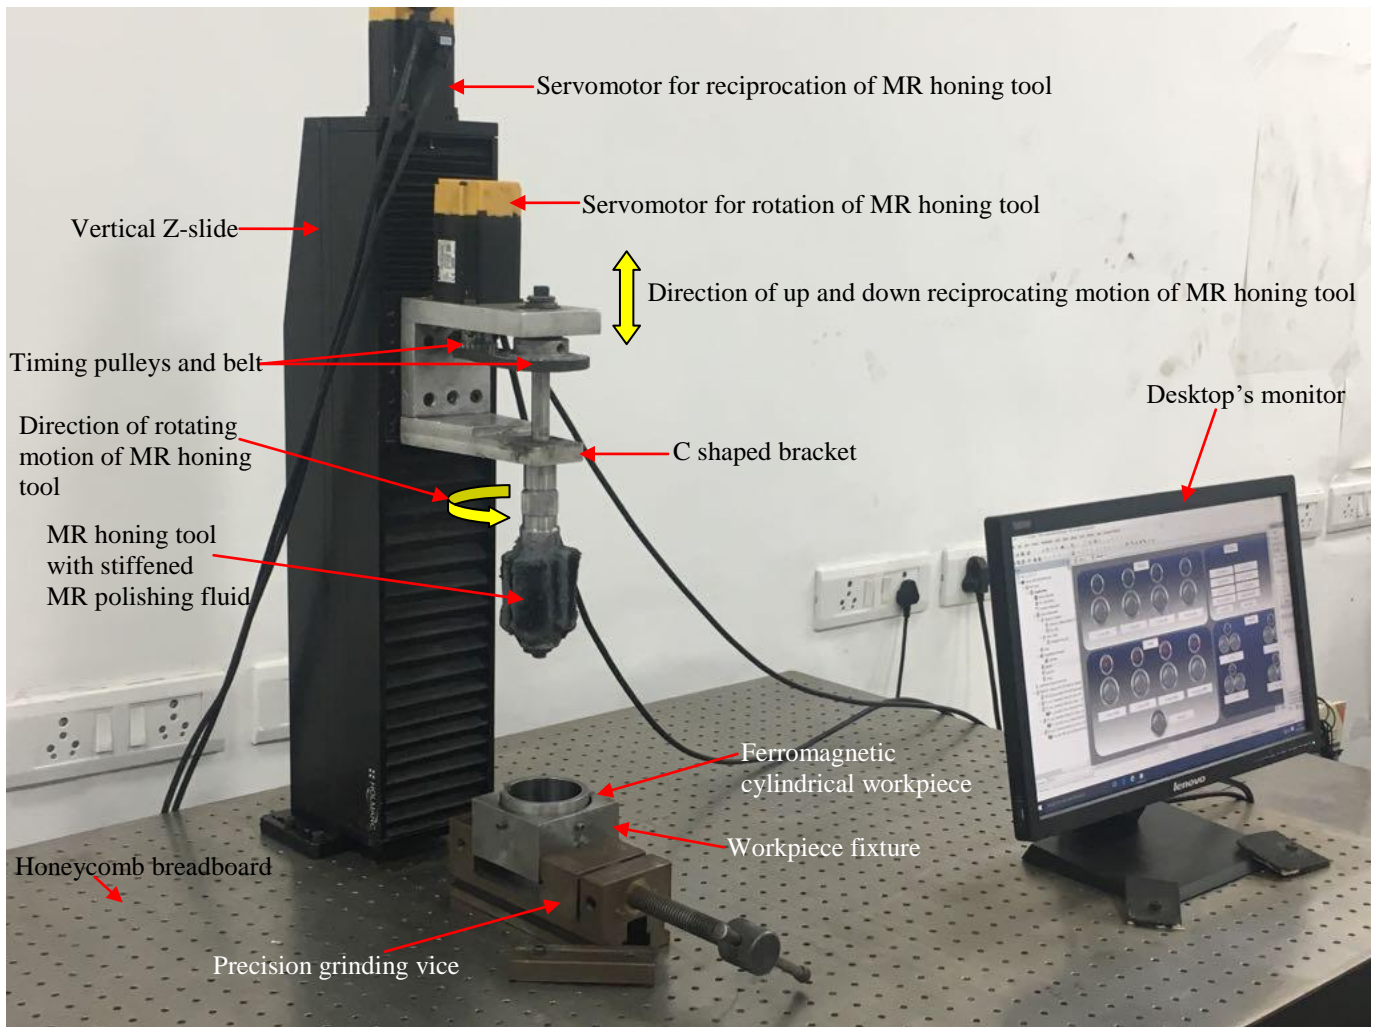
Photograph of the magnetorheological honing setup performing the finishing of the inner surface of the ferromagnetic cylindrical workpiece.
